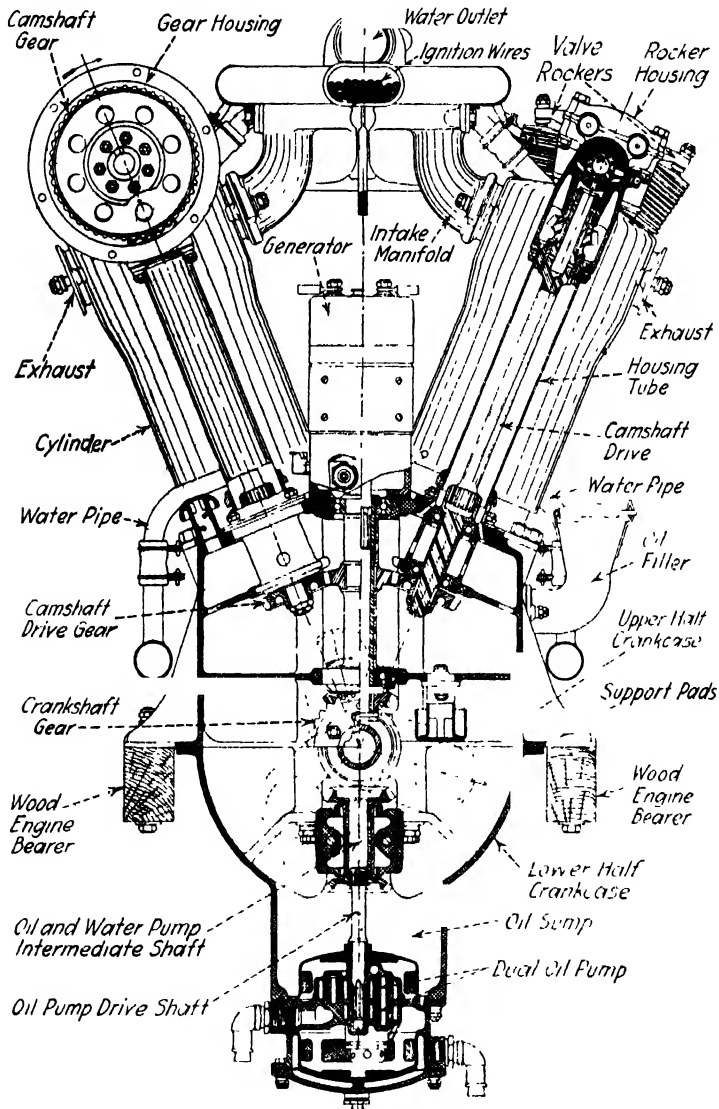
End Section of Liberty Engine Crankcase Showing Method of Oil Pump Drive.
